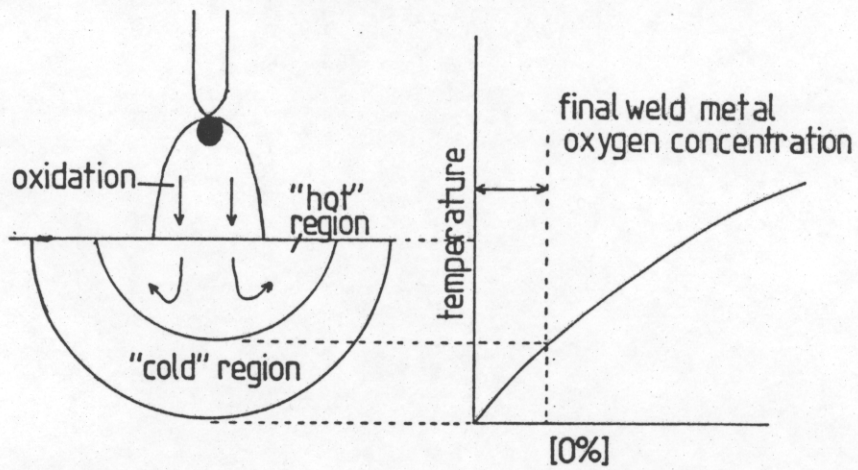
Hot and cold weld pool regions ⁽²¹³⁾.
